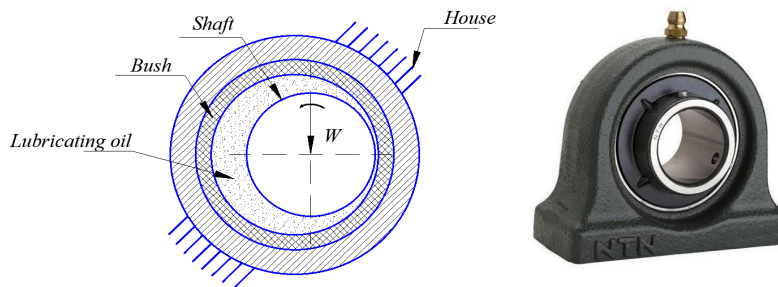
(a) Radial bearing and (b) Thrust bearing
